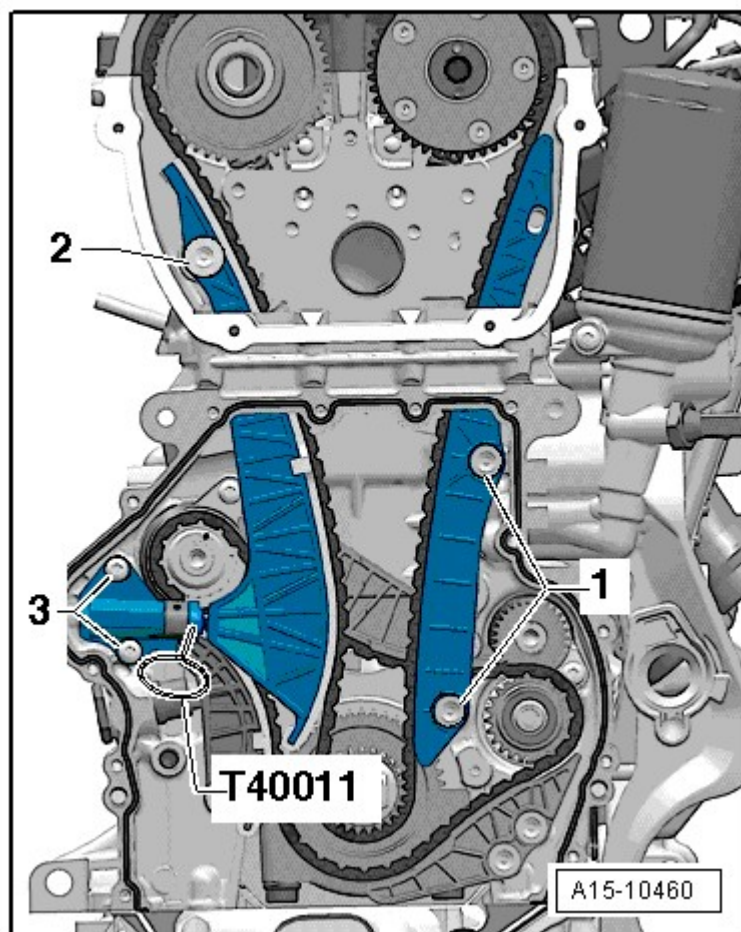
Identifying Camshaft Timing Chain Tensioner Bolts, Camshaft Timing Chain Guide Rail And Guide Pins
